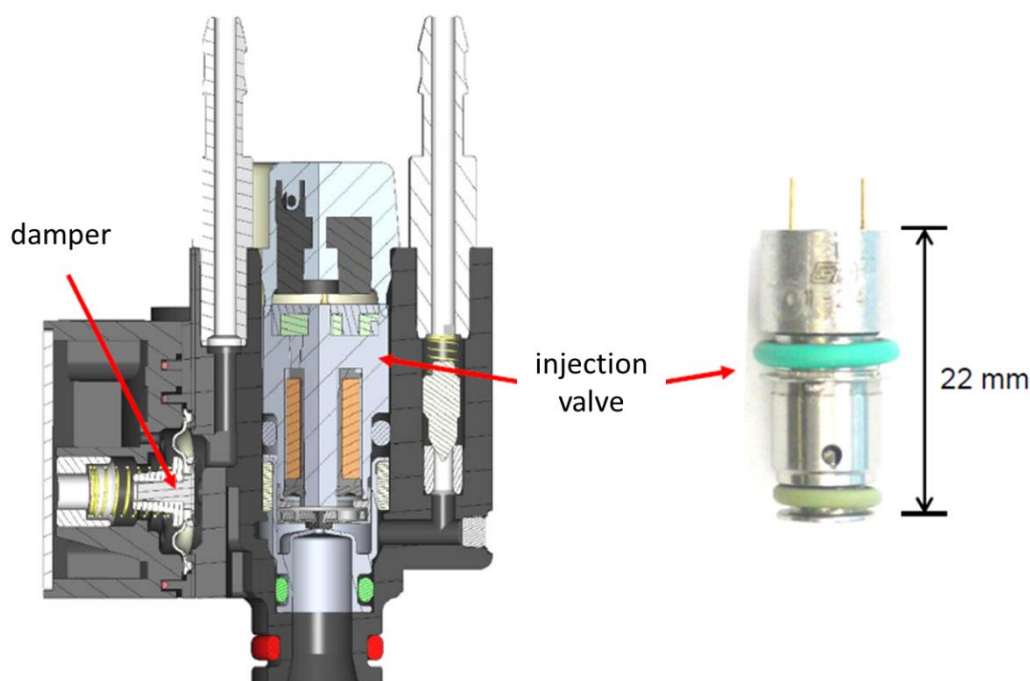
Injection valve - sectional drawing (left) and real-life injector (right) [109, p. 18]
